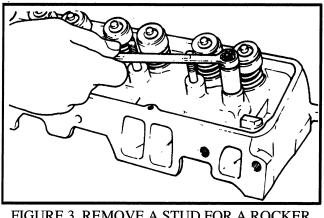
REMOVE A STUD FOR A ROCKER ARM
